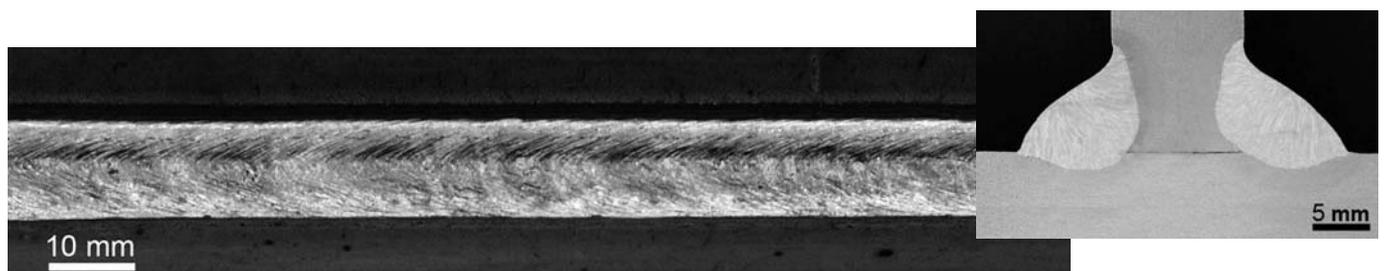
Bead appearance and macrostructure of MX-200E fillet weld made on inorganic-zinc-primer-coated steel fillet joint.
